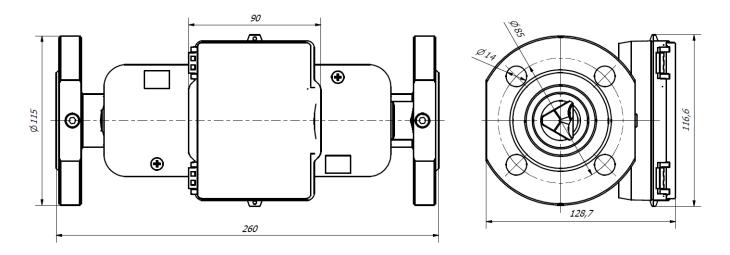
Flanged end connections DN25, mounting length L=260 mm
